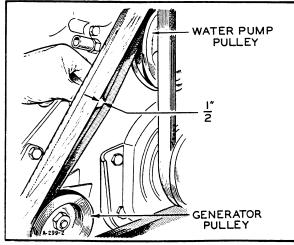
FAN AND GENERATOR BELT ADJUSTMENT
